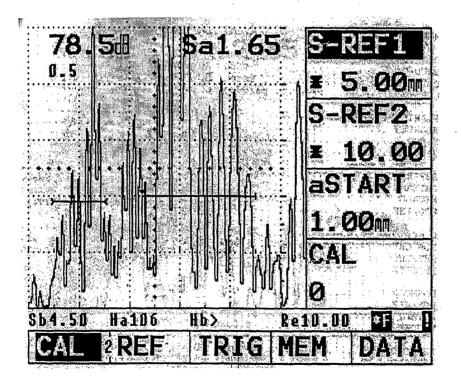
Ultrasonic echo pattern for MIG 21 Sintered brake pad
